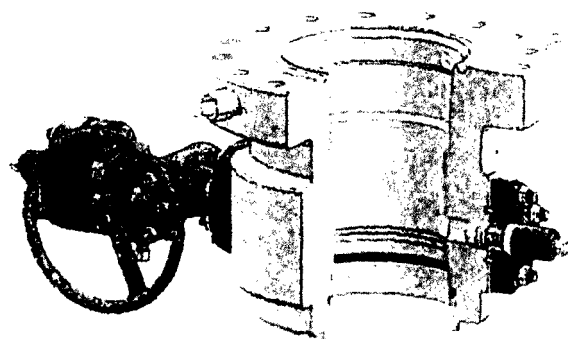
Slip-On Weld (SOW) Casing Head
